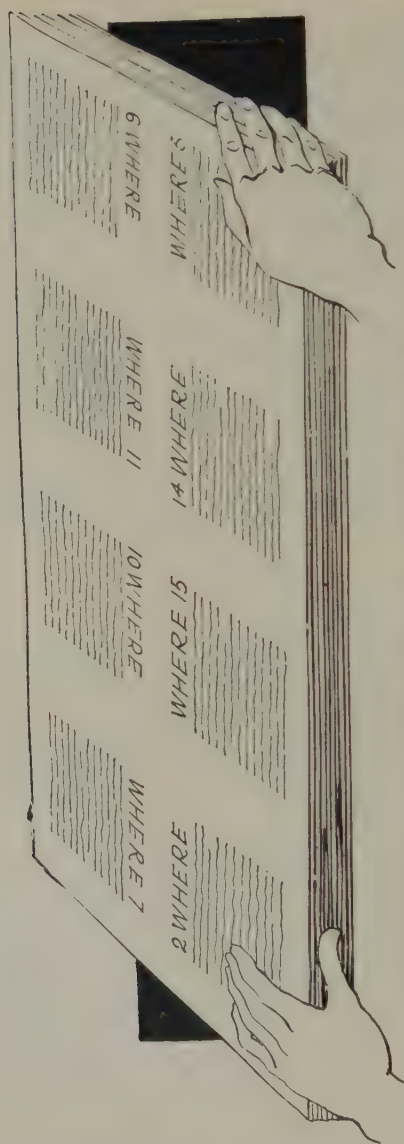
POSITION OF FLAT SHEETS TO BE FOLDED
